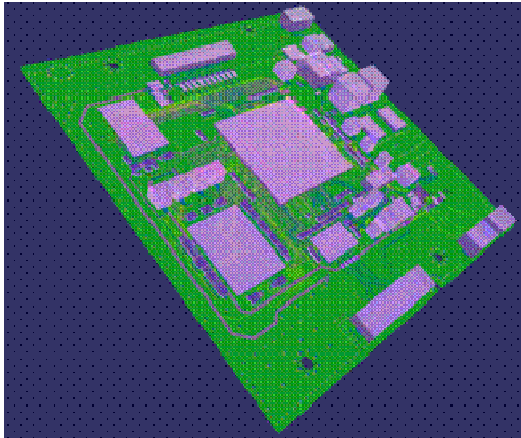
Example of a produced and tested Printed Circuit Board (PCB).
